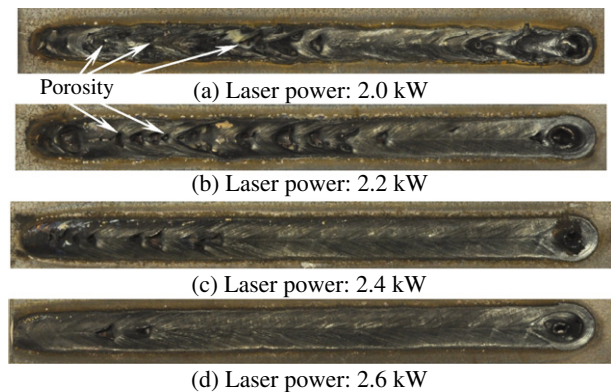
Top view of the welds under different laser powers (welding speed: 10 mm/s).
